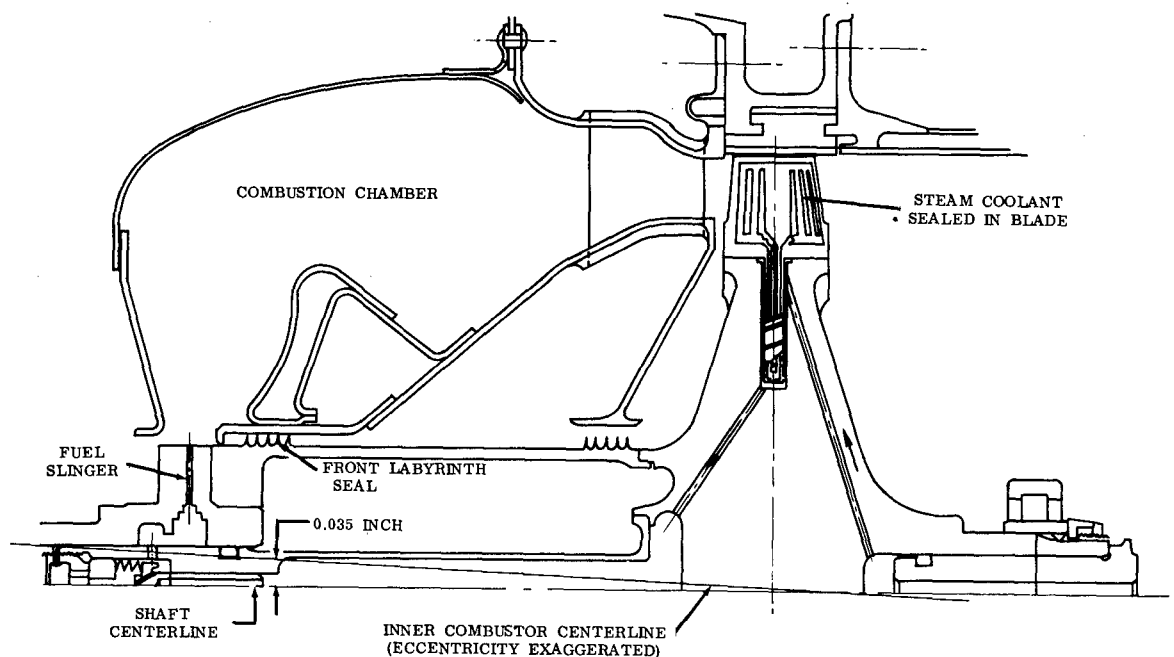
Schematic of Inner Combustor and Shaft Eccentricity.
